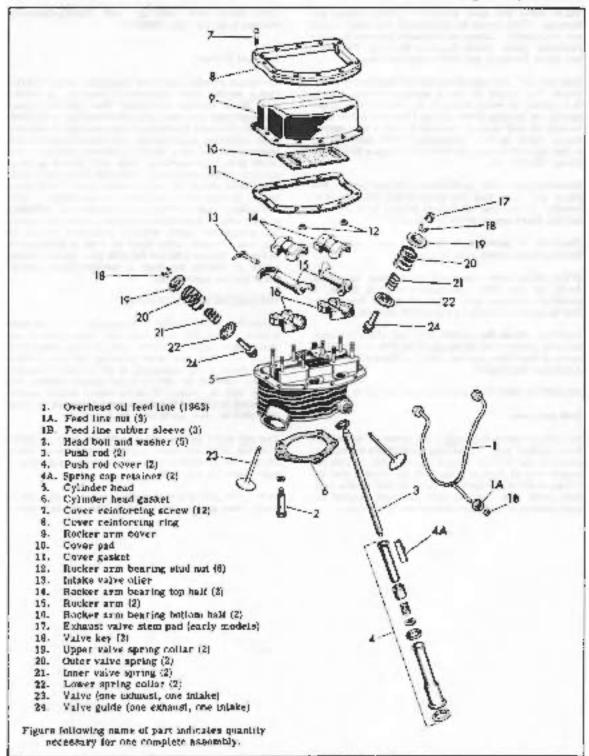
A. 1965 and Earlier Cylinder Boad - Exploded View
